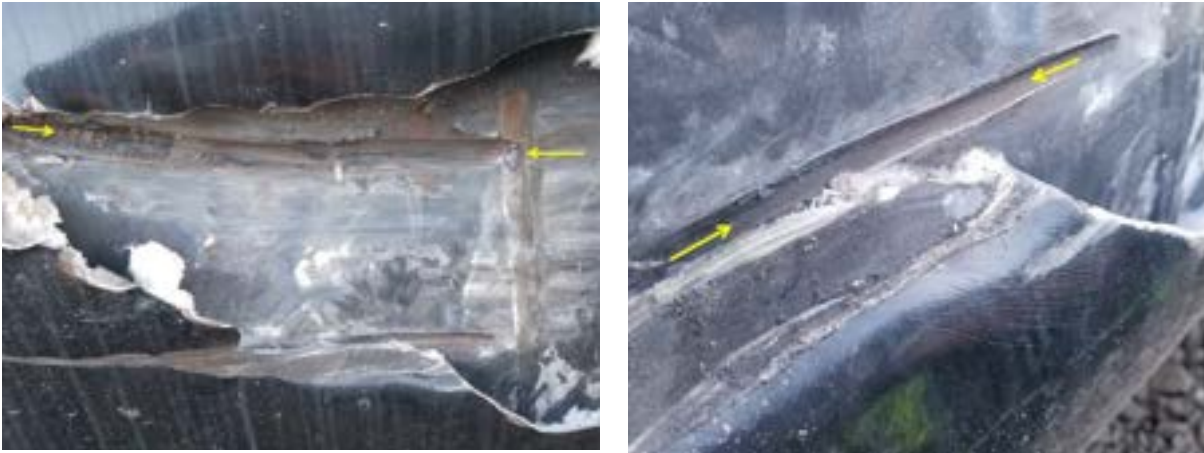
Wheel burn in tank shell due to rotation of the wheel while in contact with the tank shell and/or sliding of the tank while in contact with the flange of the wheel.¹⁴
